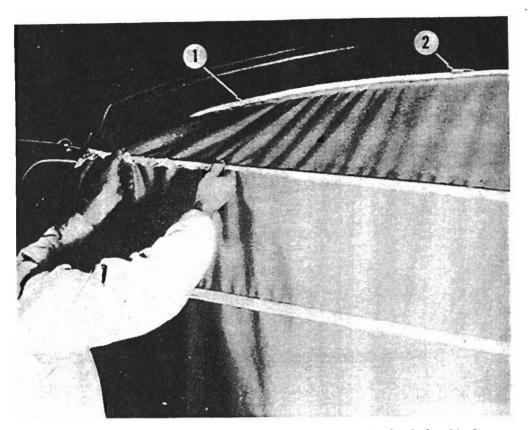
Spring the Listing Wire, and Insert the End of the Listing Wire Into the Grommet at the Roof Rail.
